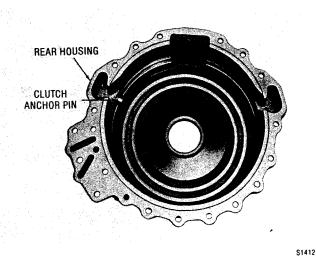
Rear housing and piston assembly (TRT 2221-1, 2421-1)
